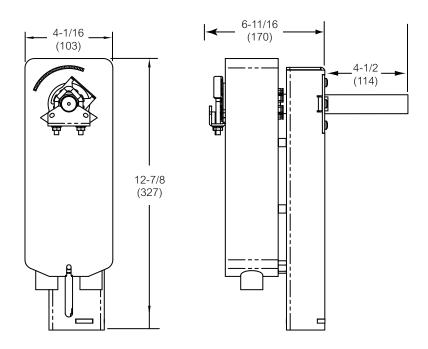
Mx41-715x-220 Actuator/Linkage Assembly
